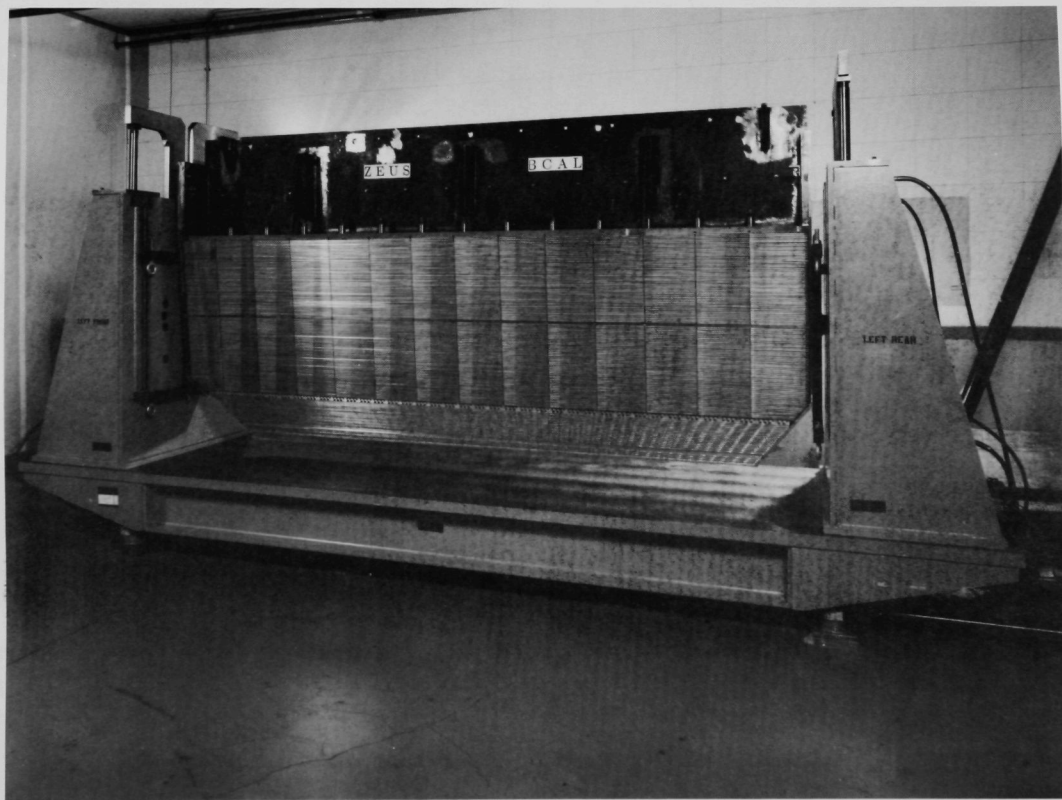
Prototype BCAL module in stacking fixture after all stacking is completed.
